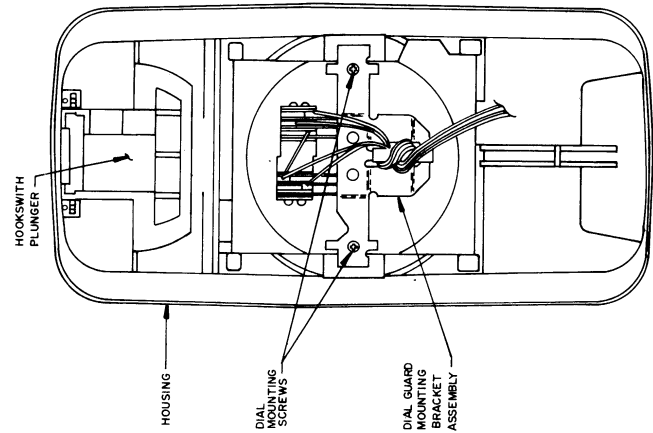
Internal View of Type 192B Telephone Housing Equipped With Rotary Dial.
